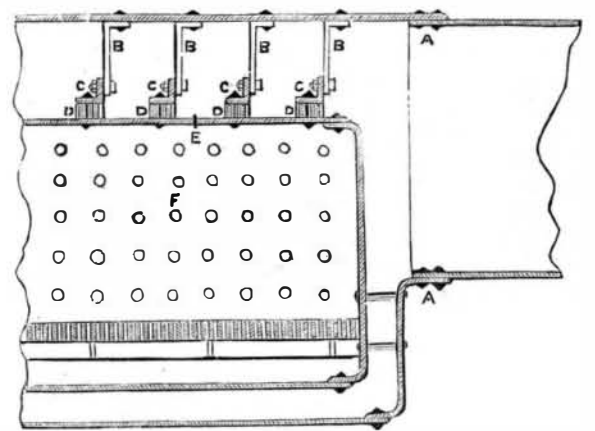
Sectional view of Fire Box, showing Stays and Crown Sheet.
